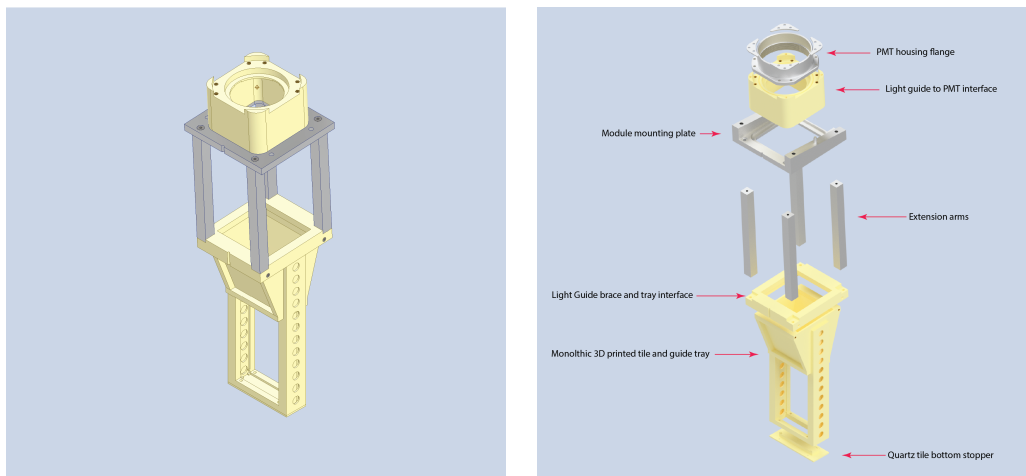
CAD renderings of the Ring 5 main detector module structure prototype, assembled (left) and exploded, with annotated detail (right).
